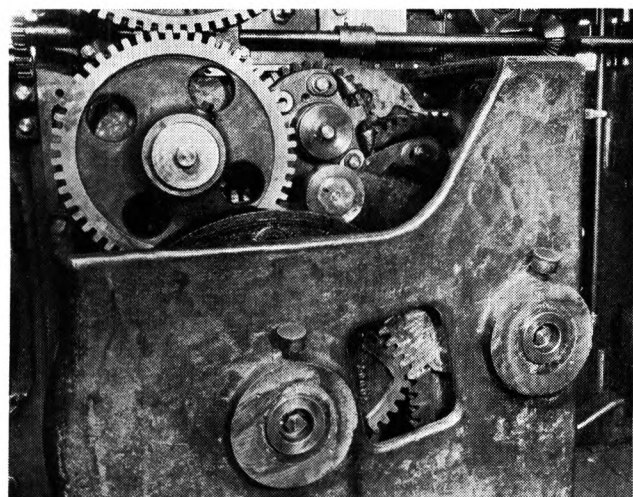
ROLLCURVE GEARS, THE DRIVER AND FOLLOWER OF WHICH HAVE A CONVEX AND CONCAVE CUSP, RESPECTIVELY
